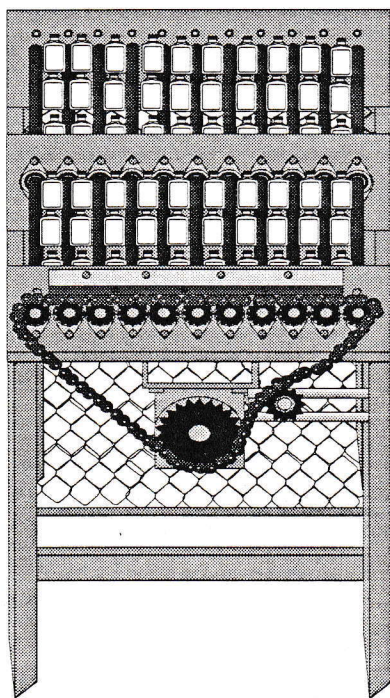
Frontal view of the automated grinding unit illustrating sample placement.
